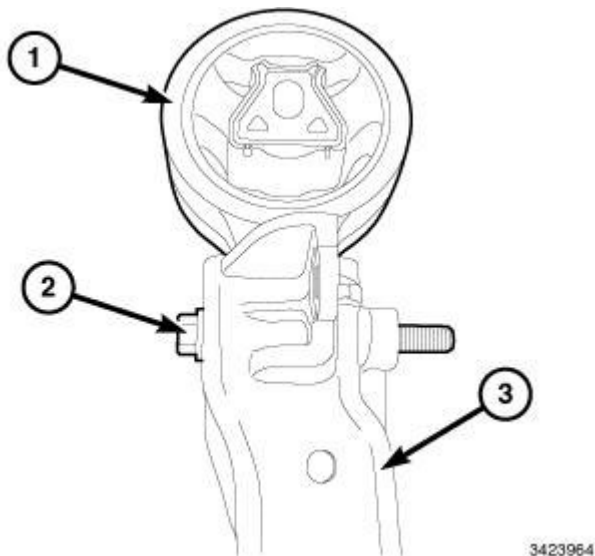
Rear Mount, Engine Mount Bracket & Bolt
